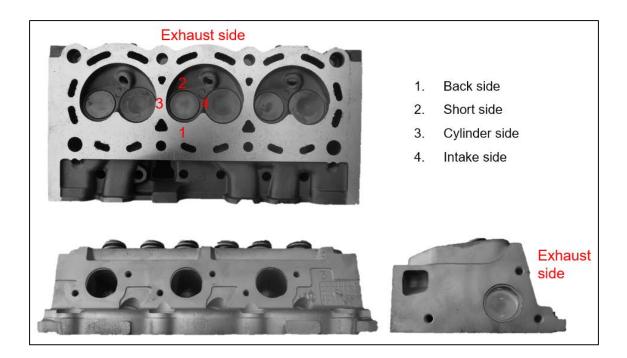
Top, Front and Side view of the die-cast cylinder head showing the location of the 4 sides
